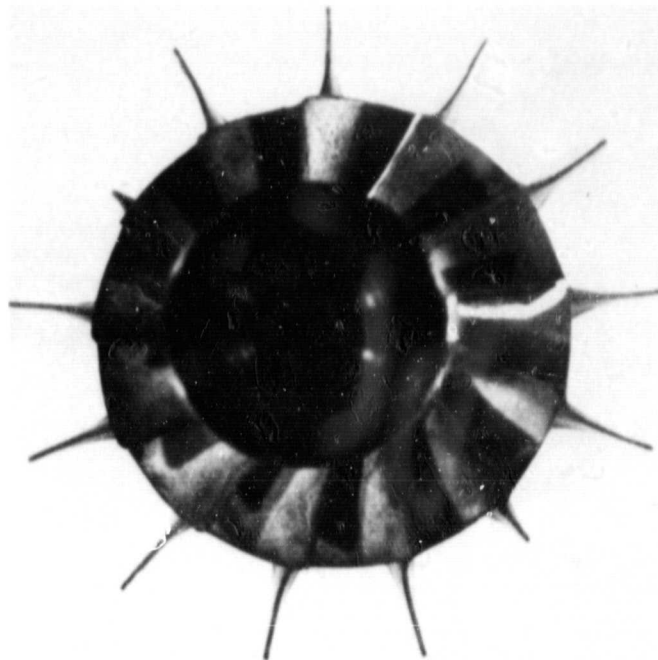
Bladed Rotor S/N 5 Prior to Spin Testing.
